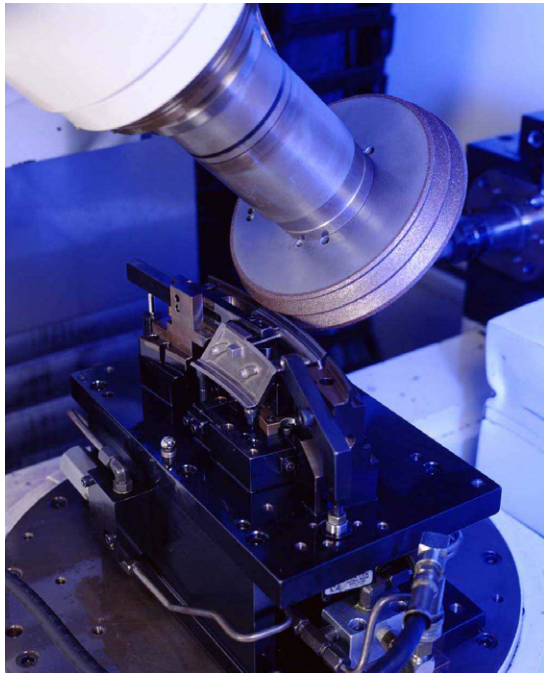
Modular fixtures for Gas-turbine blades manufacture
